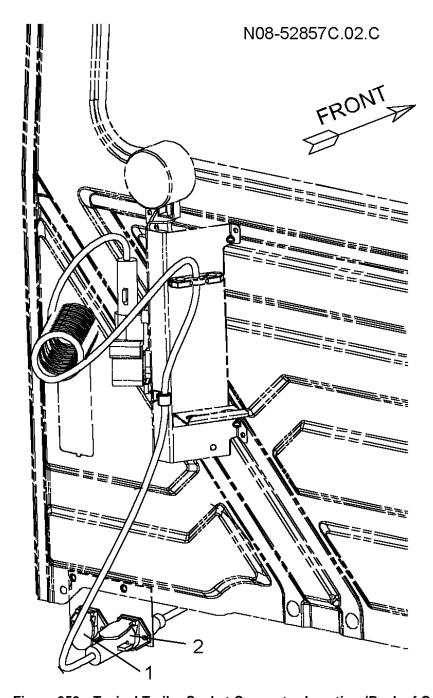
Typical Trailer Socket Connector Location (Back of Cab)
